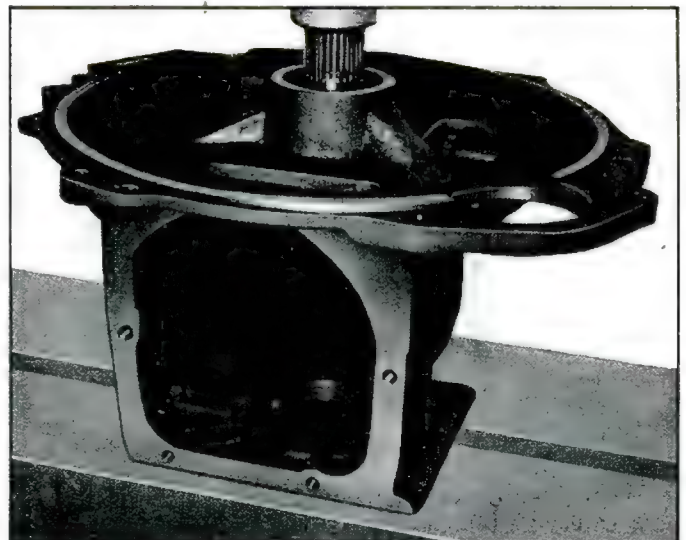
Pressing Stator Shaft and Pinion Rear Bearing Race from Carrier
